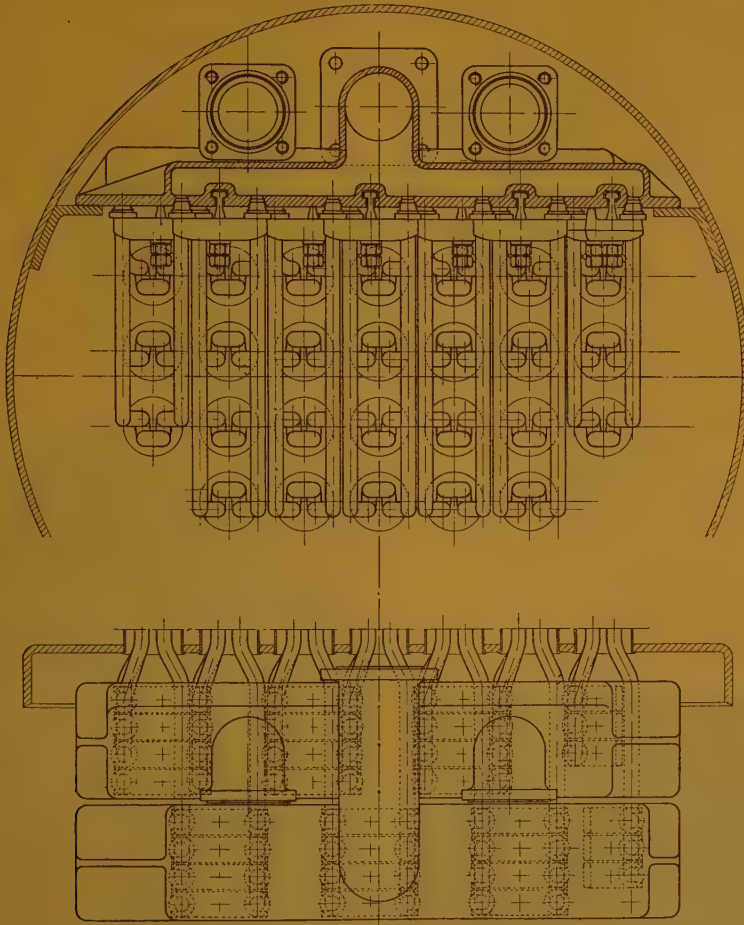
Superheater Company's separate-chamber superheater header (elevation and plan showing general arrangement).
